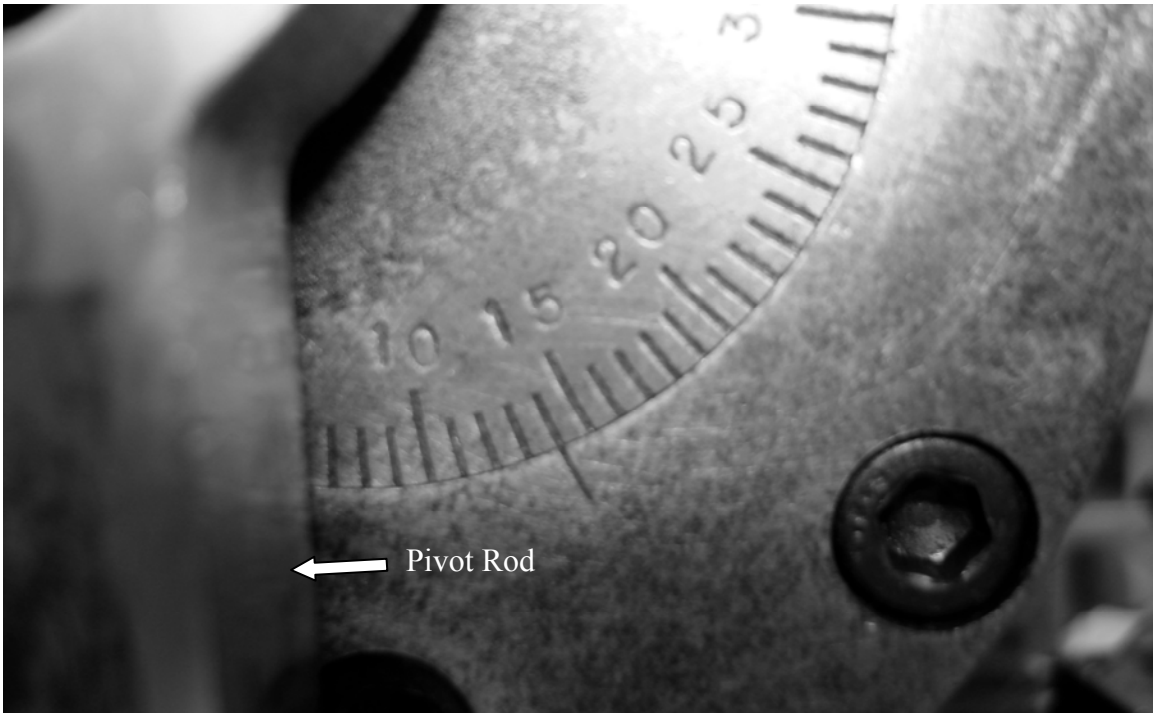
Detail of eccentric shaft deflection setting. The end deflection is set using this eccentric; this particular setting is for 14 mm.
